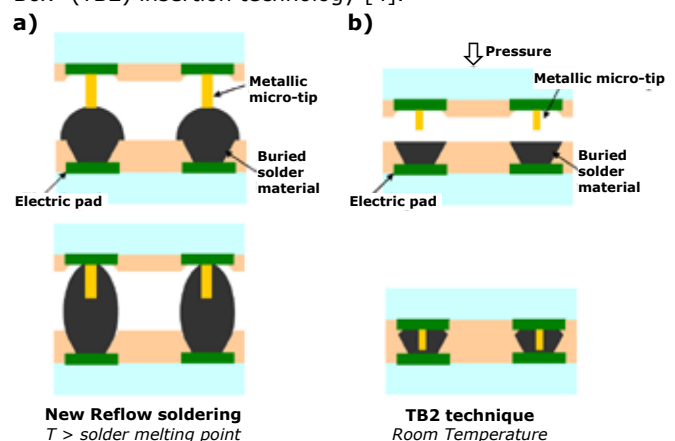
A new reflow soldering technique (a) and TB2 proprietary technique (b).
